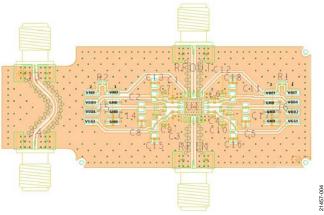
ADPA7002-EVALZ Assembly Drawing (J3 and J4 Not Installed)
